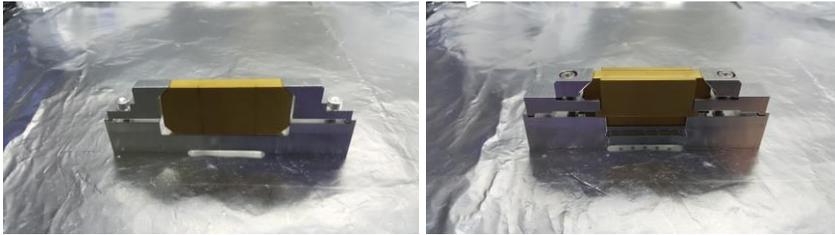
Two main types of assembled modules for an intermediate segment of SAGIVU prototype: (left) “M” (single magnet) and (right) “PMP” (pole-magnet-pole).
